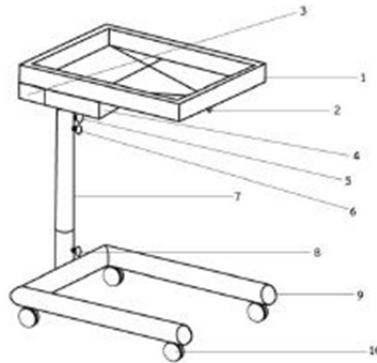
The newborn-fall prevention apparatus in 3 dimension illustration. There are two main parts. Part 1 is the baby tray [1] with hose connection [2]. Part 2 is the baby tray supporting which composes of rectangular box for baby support [4] and the single pillar [7] for adjustable height as required by screw-knobs. [5, 6, 8] The basement support is the U shape platform [9] with 4 wheels with break system [10]
